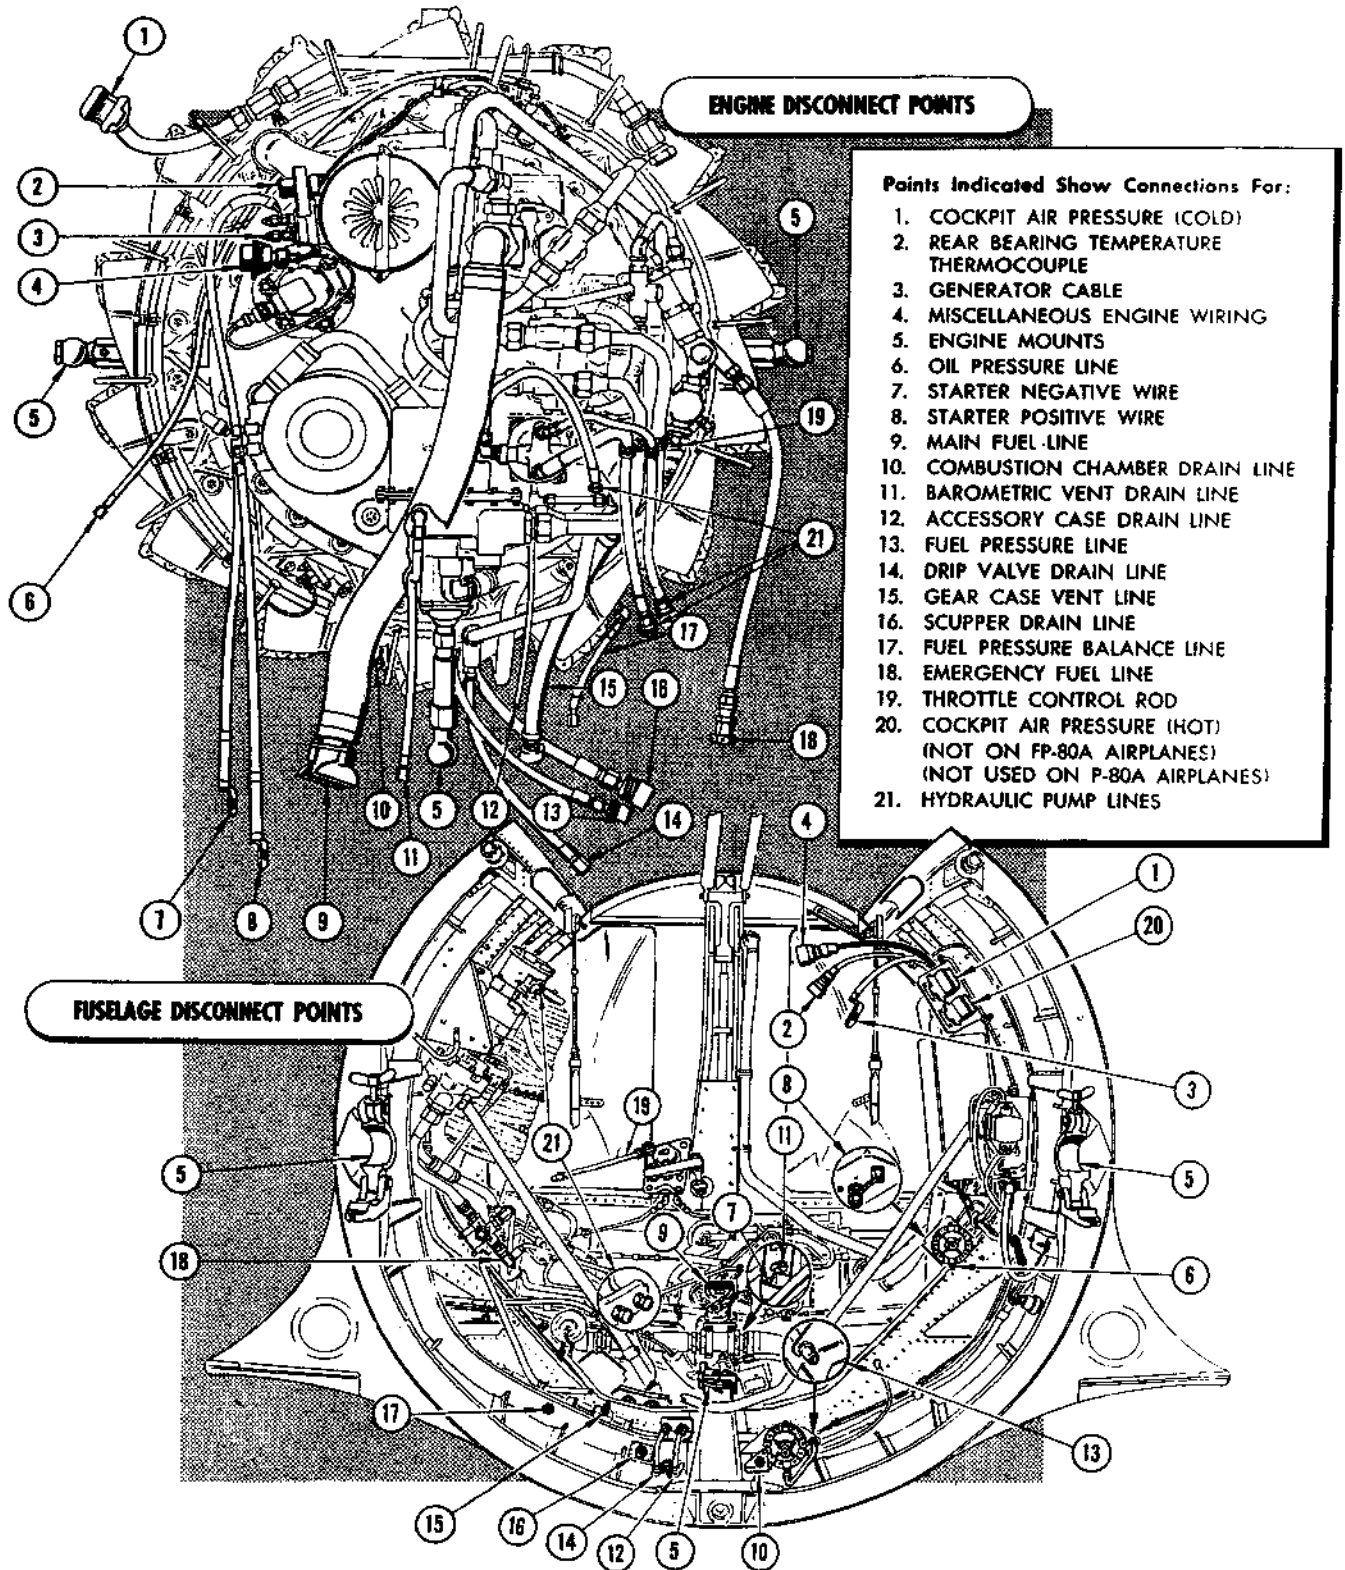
(Sheet 2 of 7 Sheets) — Aft Section and Engine Removal
